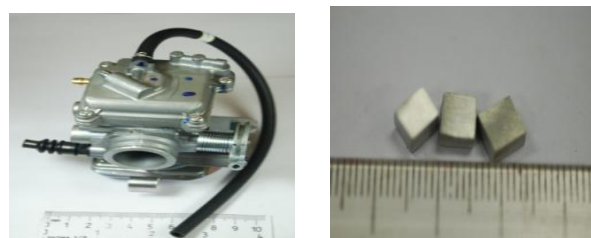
(left) Carburetor of motorcycle, and (right) sample specimens.
